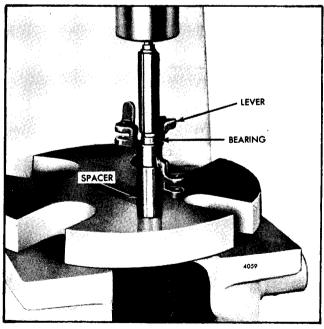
Installing Bearings in Control Link Lever using Tool J 21068
